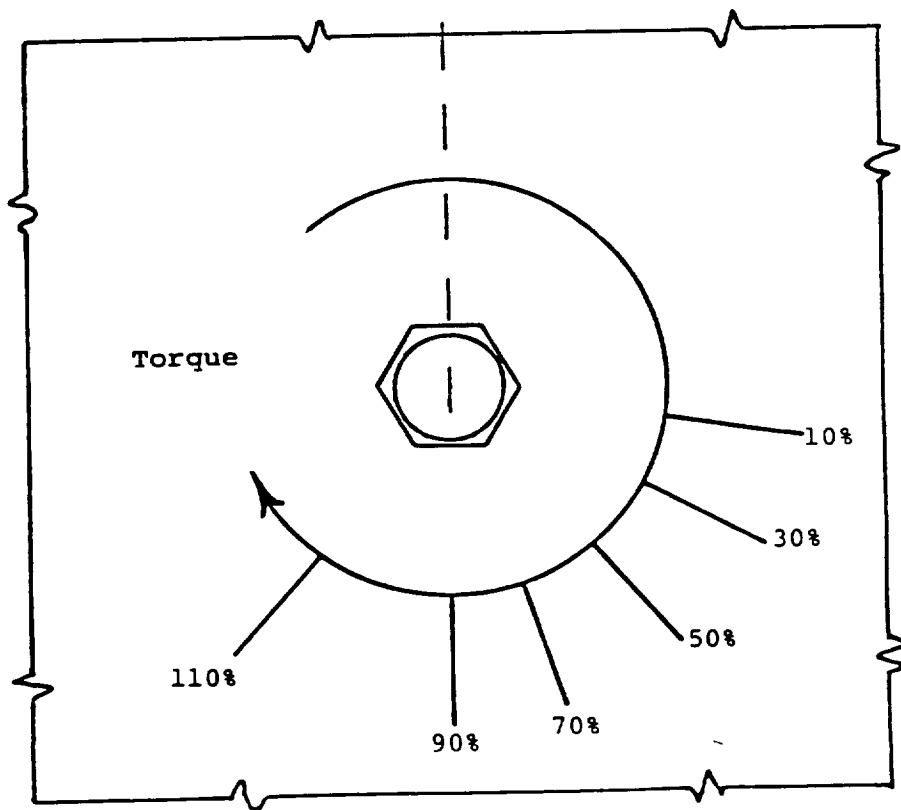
Torques Applied to a Bolt and Nut Which Hold Two Plates Together
